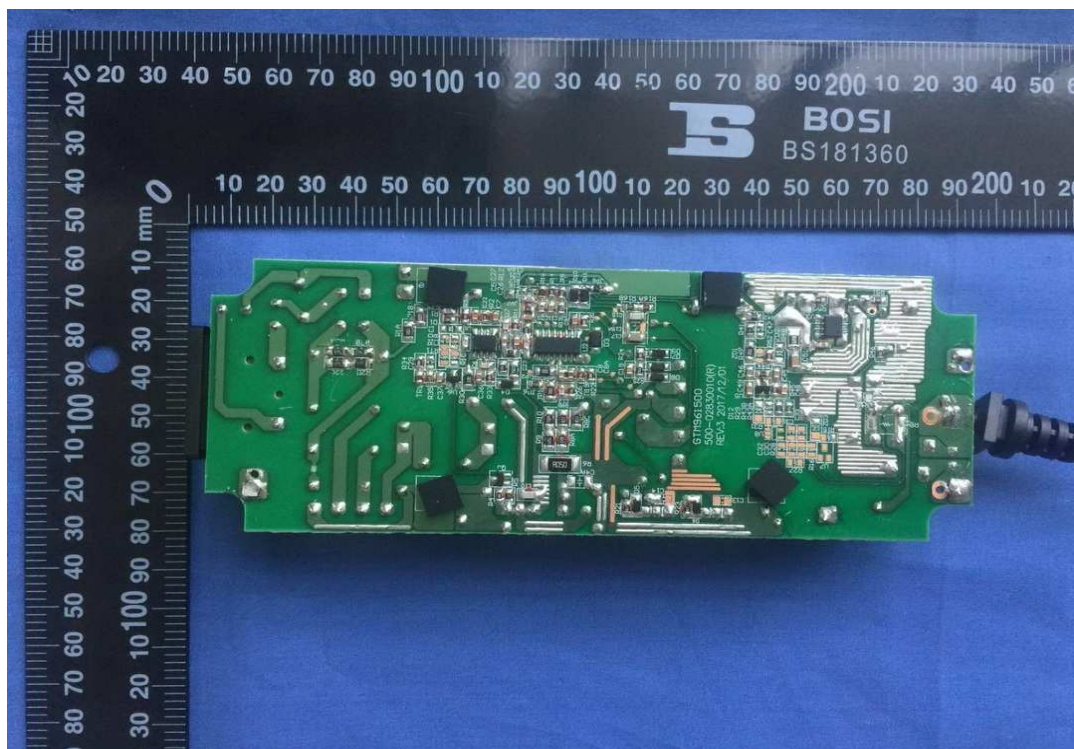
PCB Bottom Side (12.0-36.0V model, Class II)
